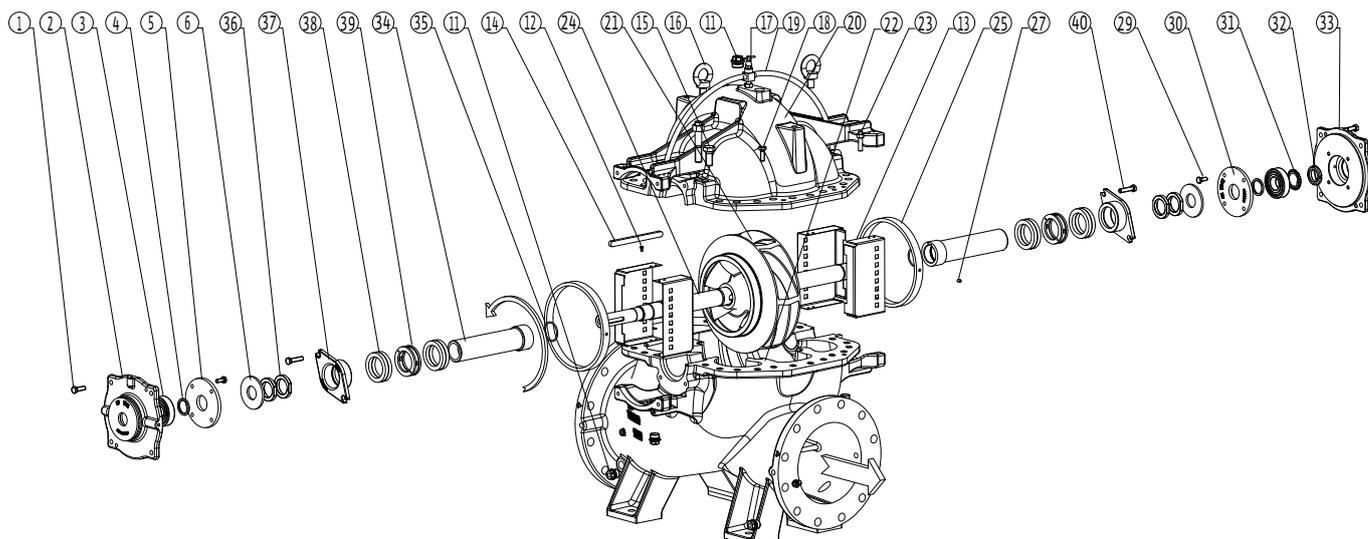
Exploded view of Atmos TERA-SCH hydraulic (version with gland pack)
